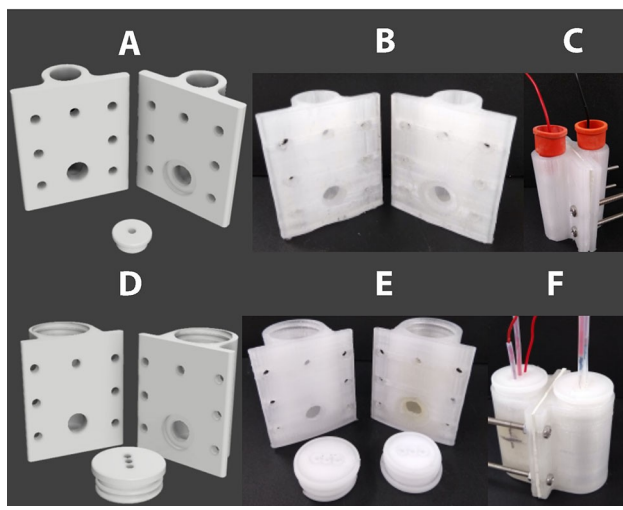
CAD drawings and 3D printed divided cells, for smaller (upper) and larger (lower) scales.
